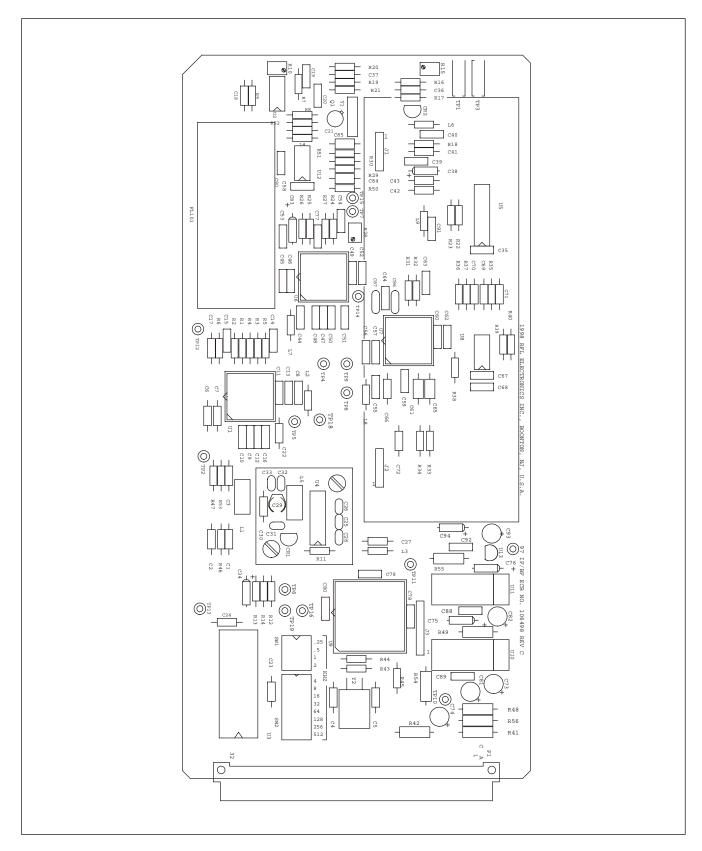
Component locator drawing, RFL 9780 IF/BF Module (Assembly No. 106495)
